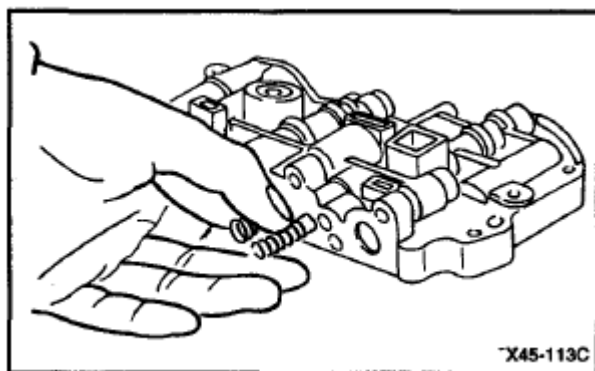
Removing/Installing Torque Converter Control Valve & Torque Converter Control Spring
